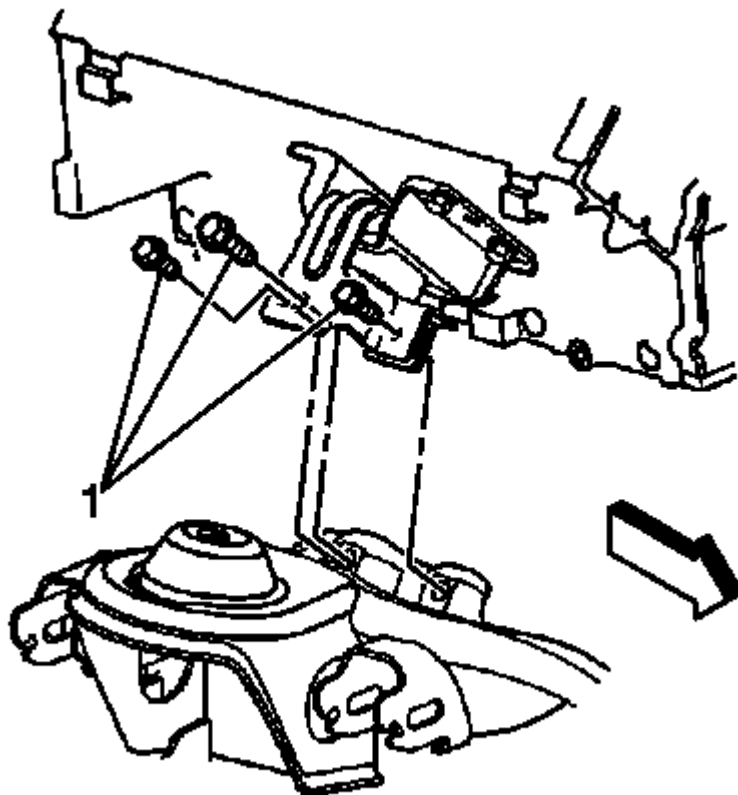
View Of Engine Mount-To-Engine Mount Bracket
